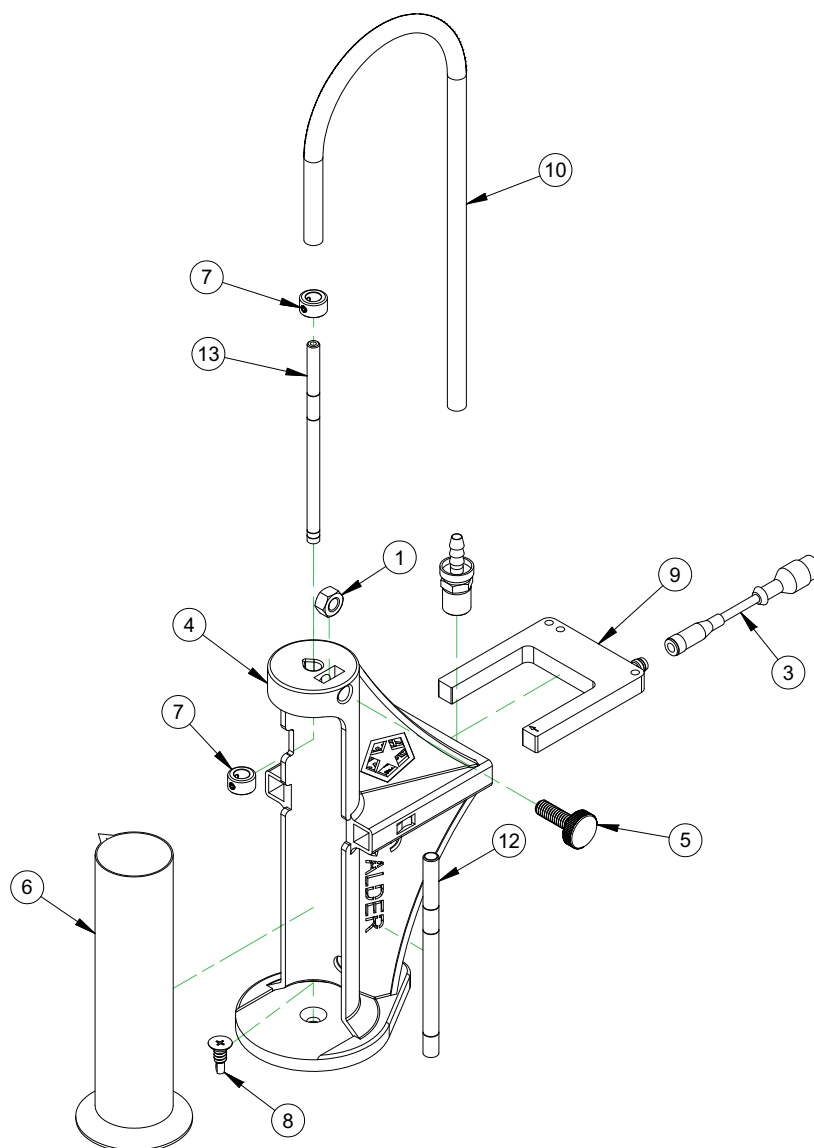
PILOT VALVE TESTER ASSEMBLY PARTS LIST 1
